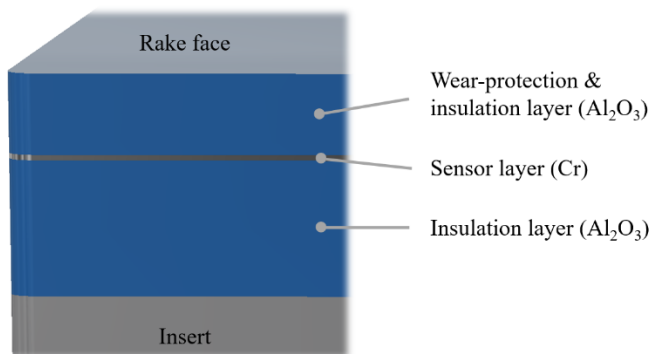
Thin-film sensor system representation for integrated sensors on the rake face of cutting tools.
